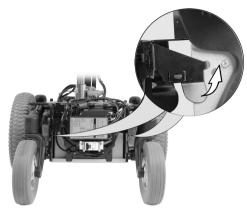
Remove the electronics by gently pulling the locking handles on the left and right side of the chassis outwards and disengaging the tabs
